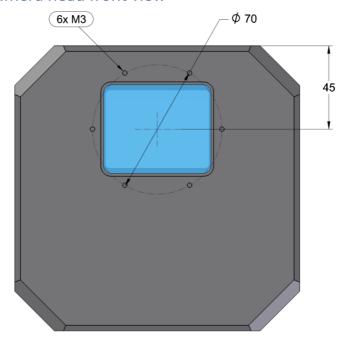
C5A camera head interface for filter wheel or tiltable adapter base
